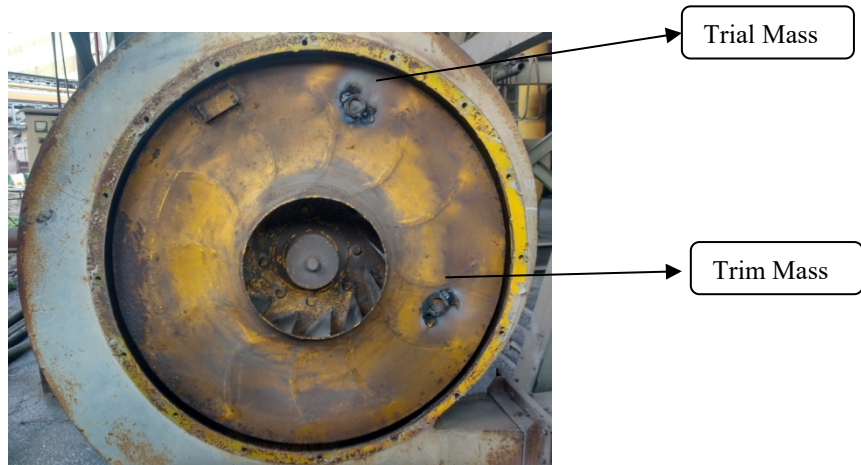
Picture of the Impeller showing the Trial Mass & the Trim Mass welding spot.
